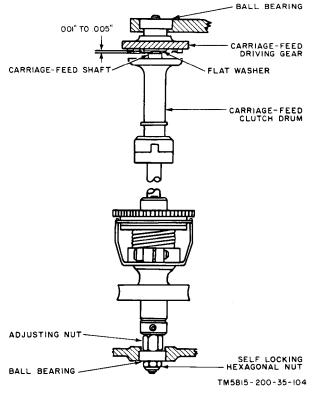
Carriage-feed, driving gear end-play adjustment.
